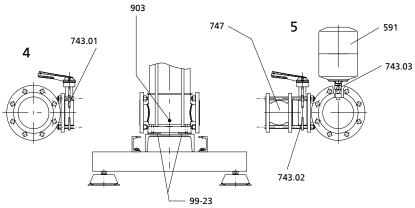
General assembly drawing of Hyamat SVP with Movitec 25, 40, 60, 90
